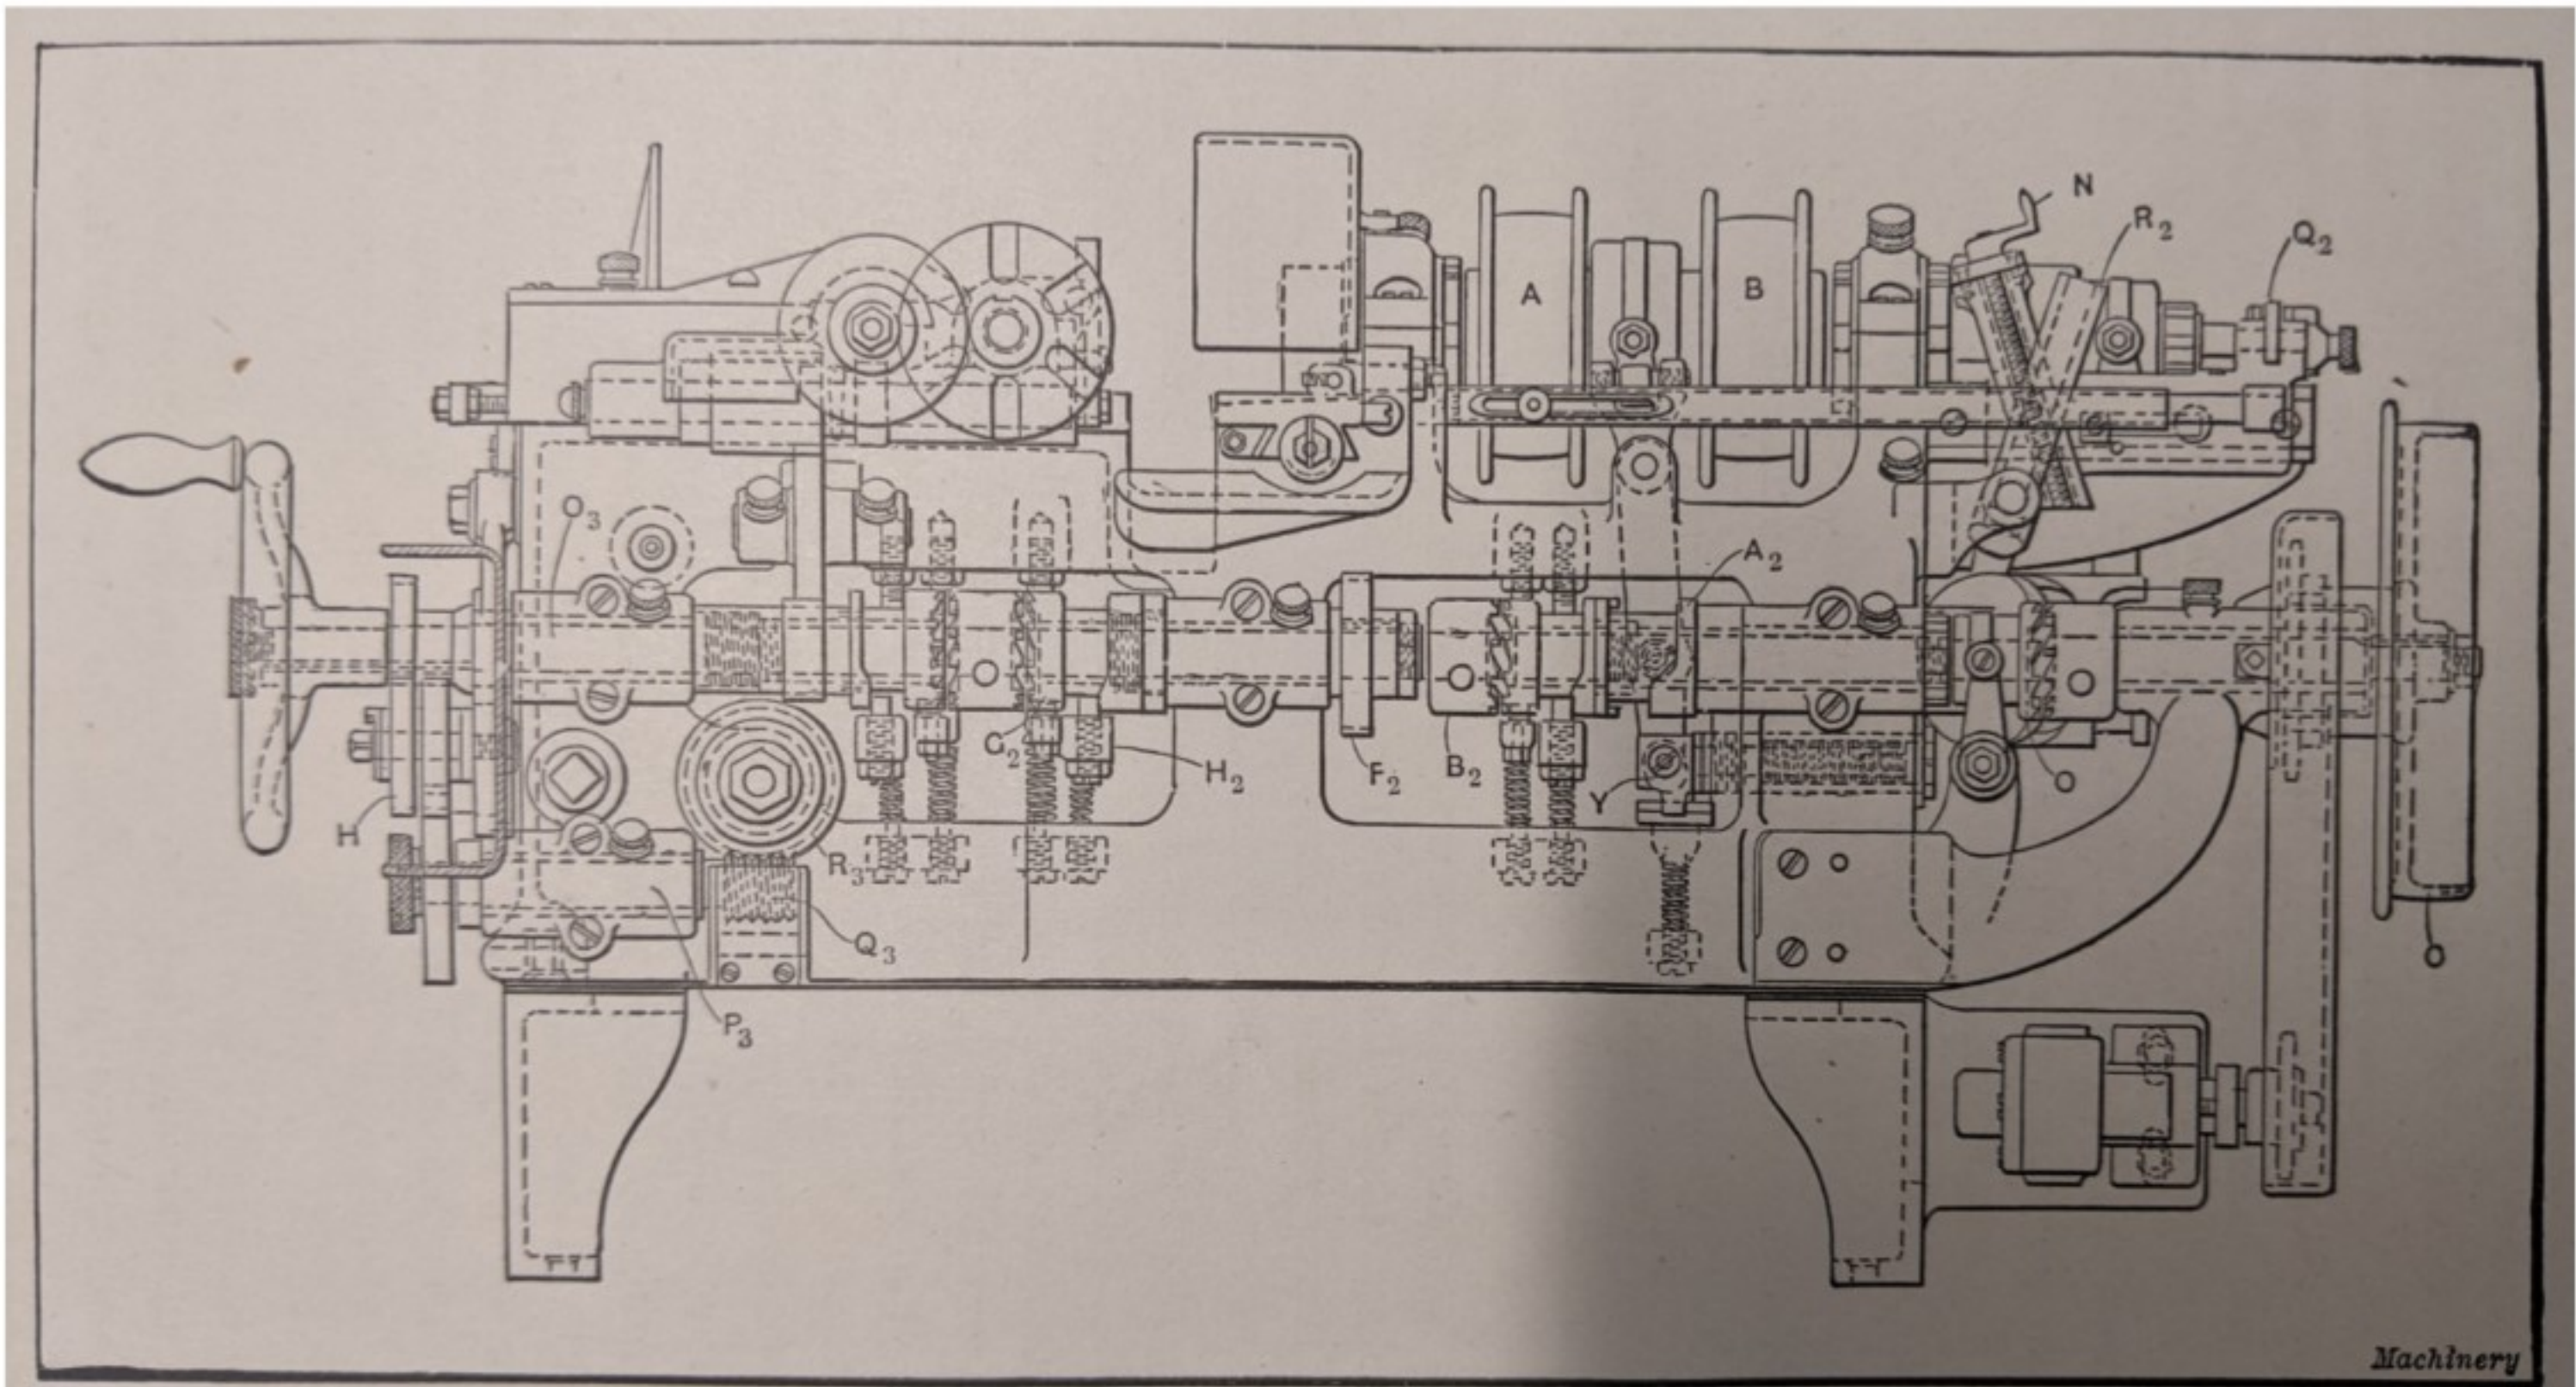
Rear Elevation of the No. 00 Brown & Sharpe Automatic Screw Machine
